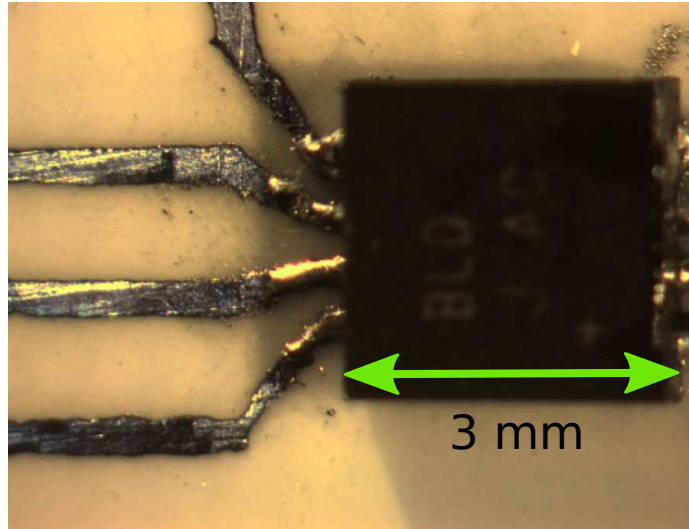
Circuit traces for a TDFN8 IC package fabricated with inkjet printing masking.
